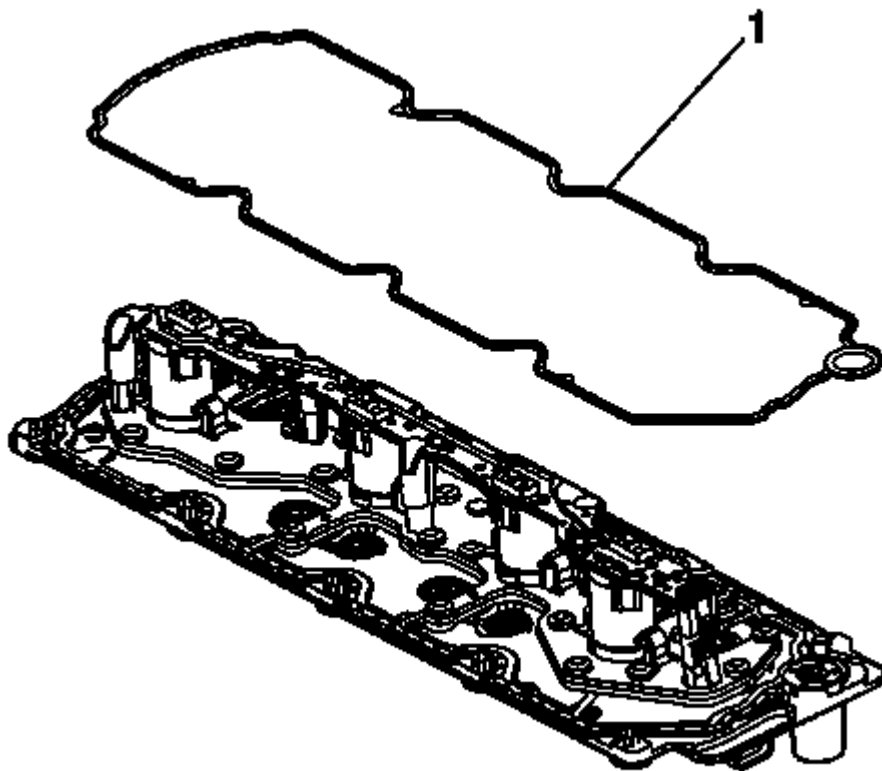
Identifying Valve Cover Outer Gasket
